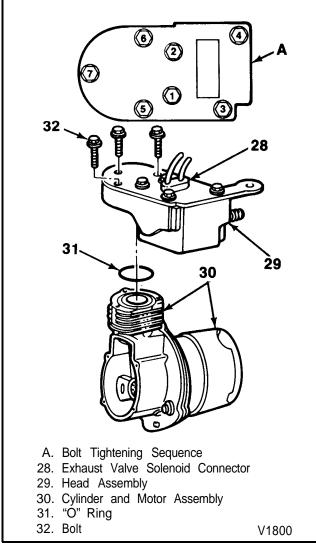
Compressor Head, Motor and Cylinder Assembly
